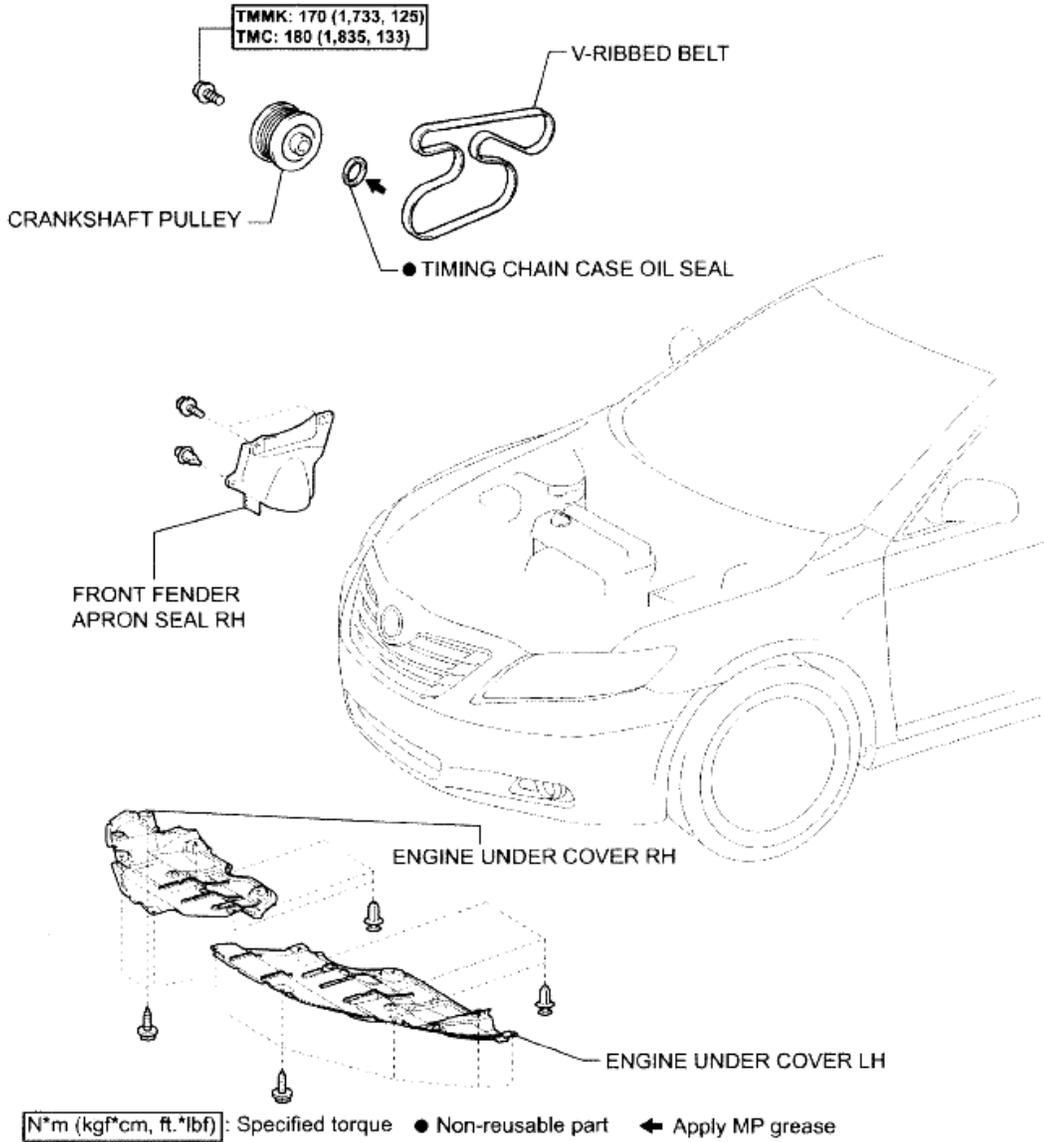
Identifying Engine Front Oil Seal Components With Torque Specifications
